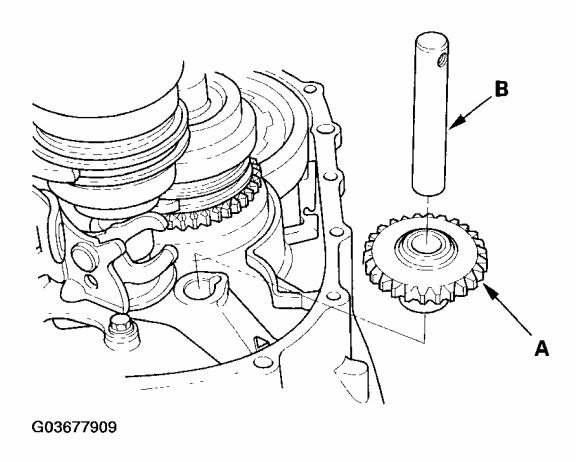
Removing Reverse Idler Gear And Reverse Gear Shaft Courtesy of AMERICAN HONDA MOTOR CO., INC.
